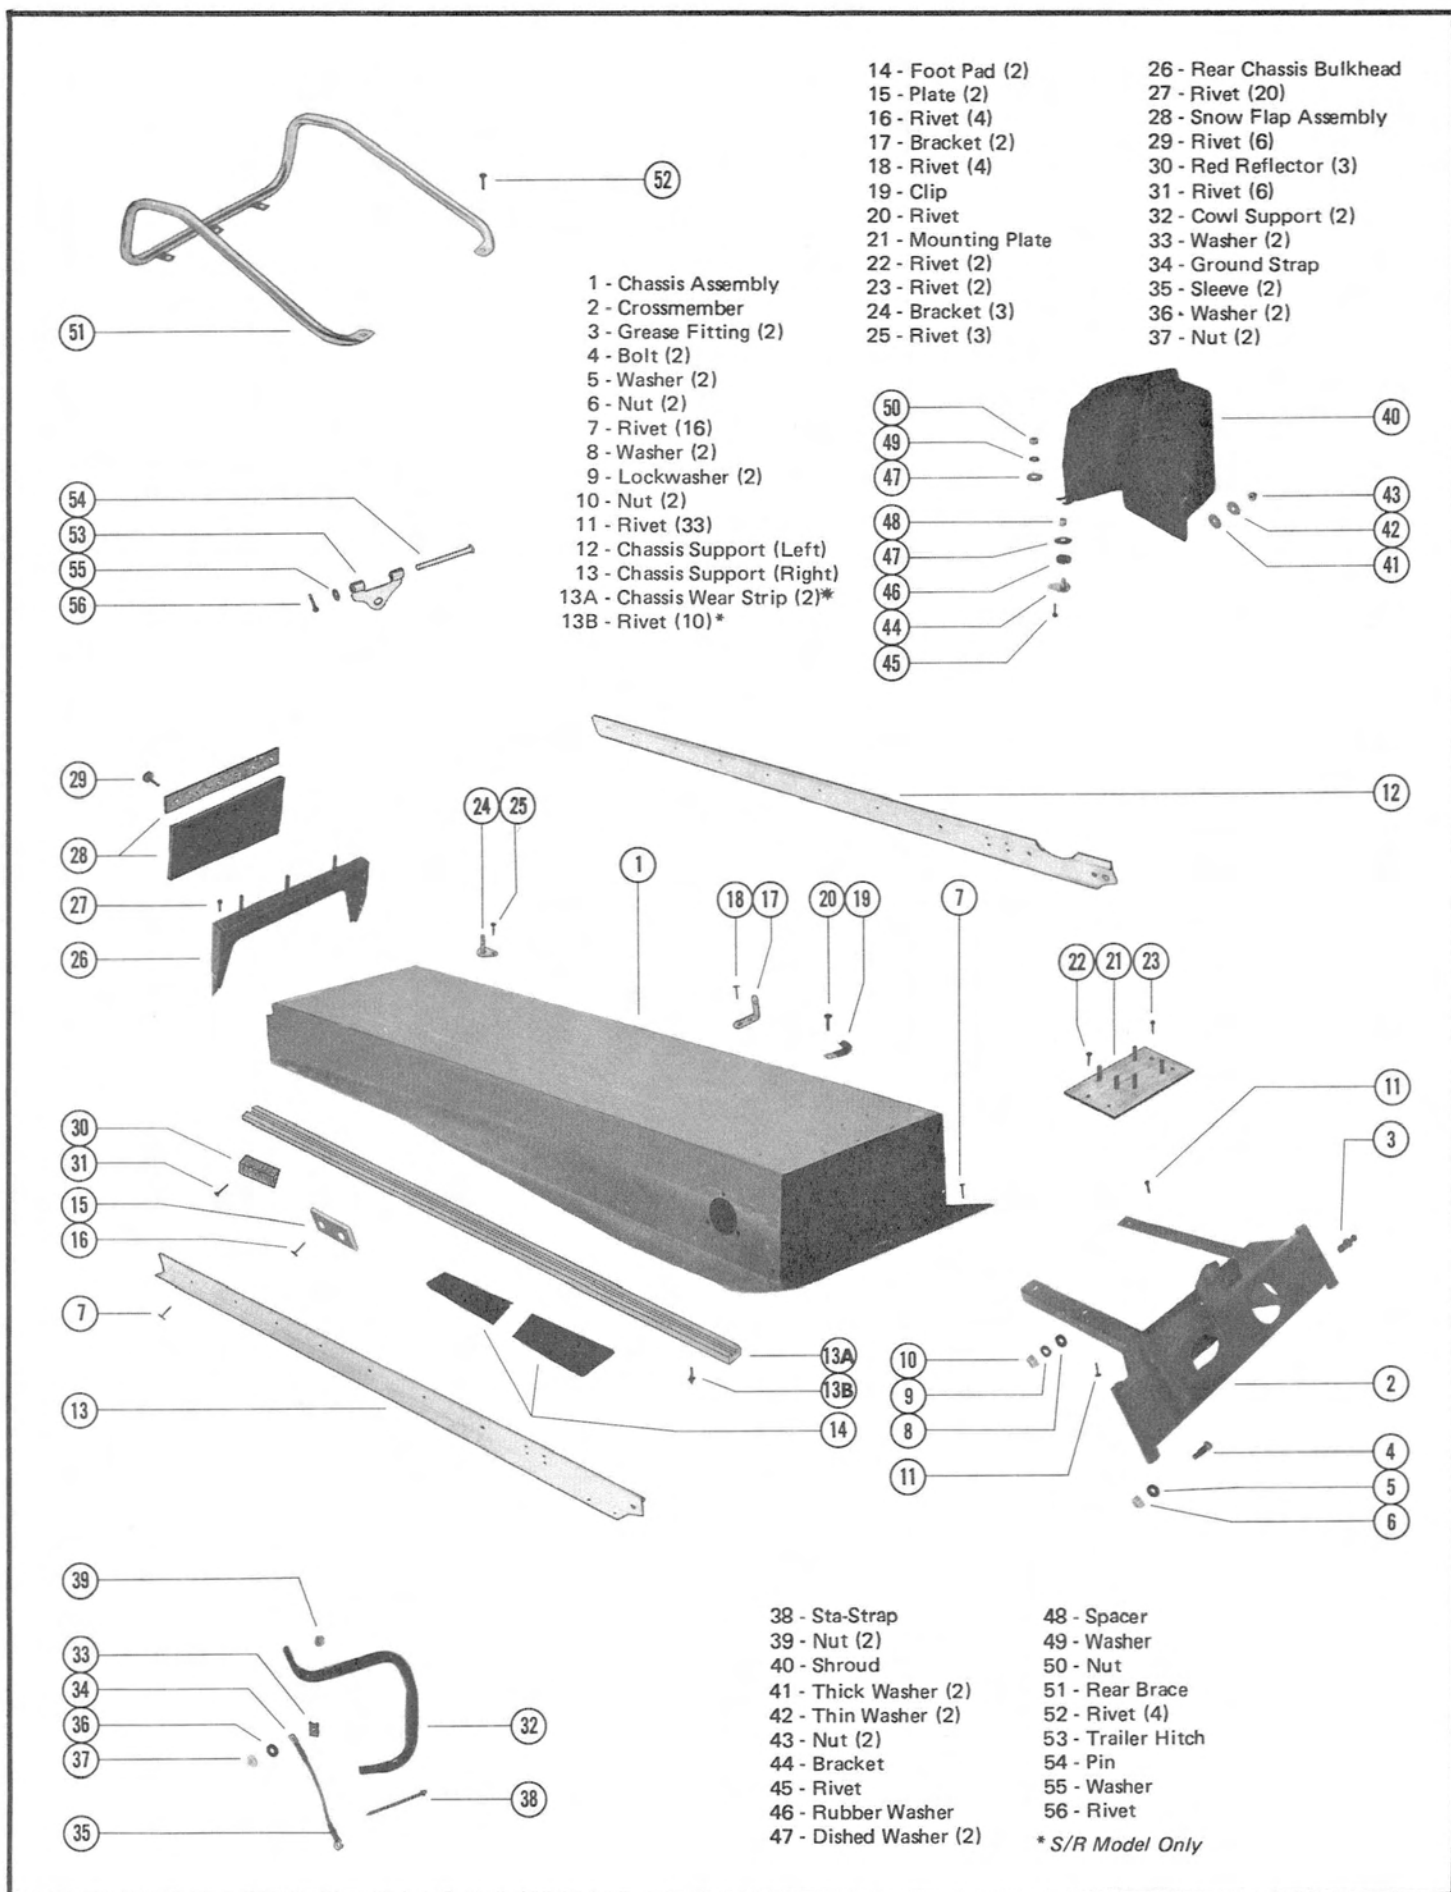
Exploded View - 440 MAX (Chassis Serial No. 3709838 and Above) and 440 S/R Chassis
